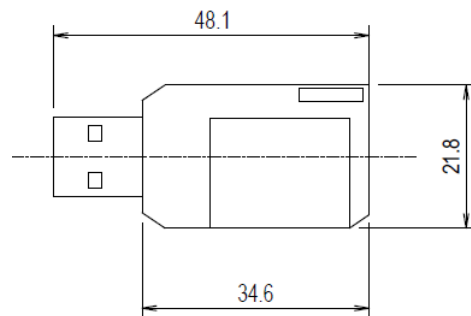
LGHA-WWW1301 Dimension (Unit : mm)
